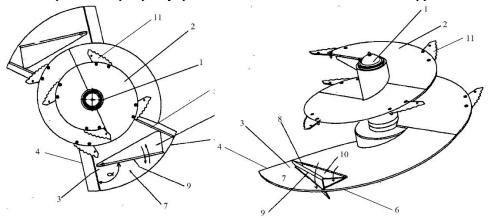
Variants of auger design according to patent EP2119345A1 [13]: 1 – spiral flight; 2 – vertical shaft; 3 – pickup segment; 4 – leading edge; 5 – trailing edge; 6 – peripheral edge; 7 – supporting surface; 8 – guiding element; 9, 10 – working surfaces of the guiding element; 11 – cutting elements
